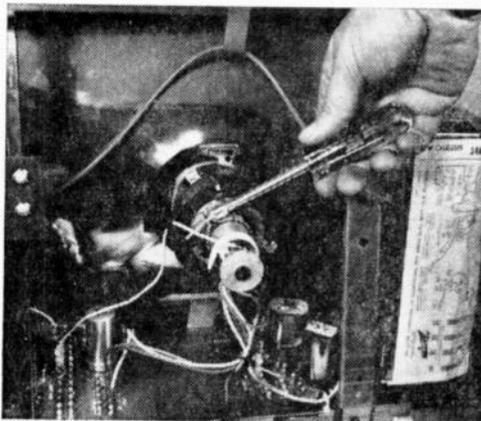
When yoke is positioned, tighten clamp screw, being careful not to over-tighten.
